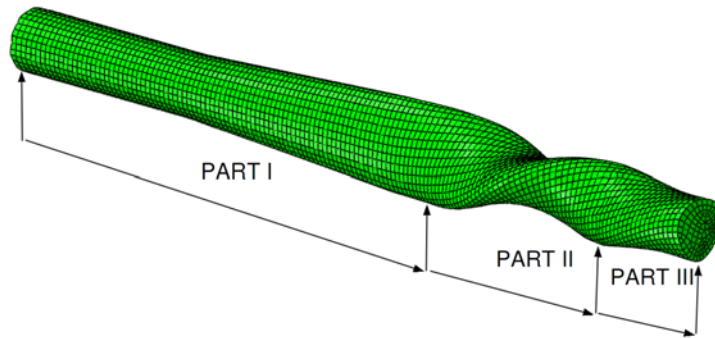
Schematic extrusion of the nonlinear twisting workpiece
